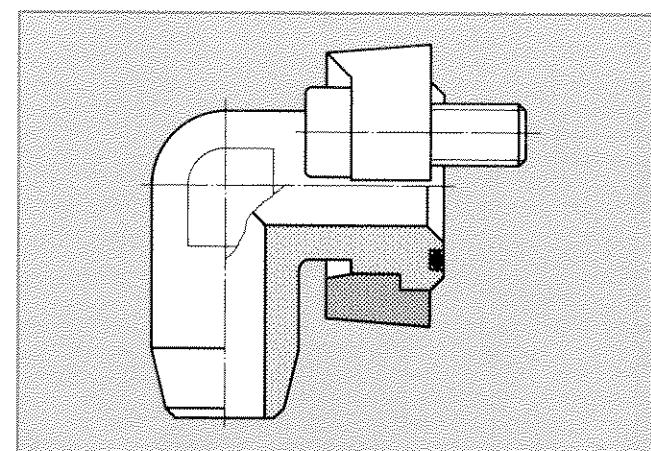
SAE flange, multi-piece to SAE-J 518 C, elastic seal, securing function by screws. The split flange shoulders can be a disadvantage
